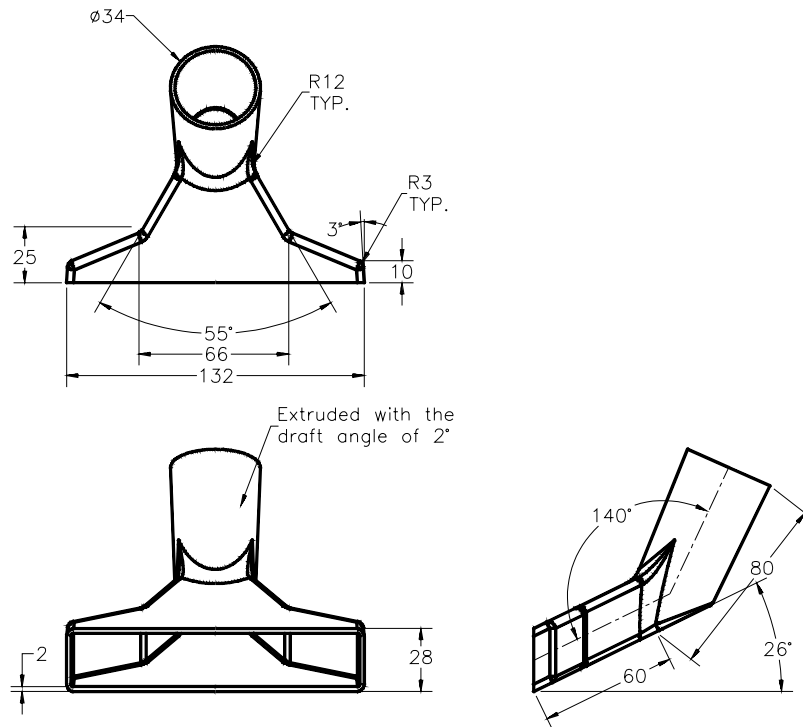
Views and dimensions of Vacuum Cleaner for Tutorial 1
